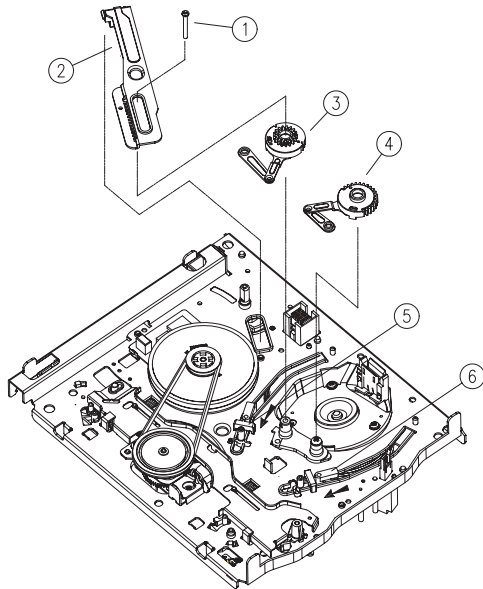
Disassembly of the LOADING RACK, LOADING ASS'Y and the SLANT POLE ASS'Y
